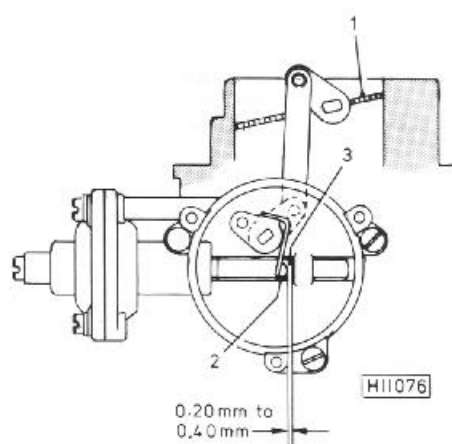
Checking the shaft arm to rod clearance (DGAS types) (Sec 9)
